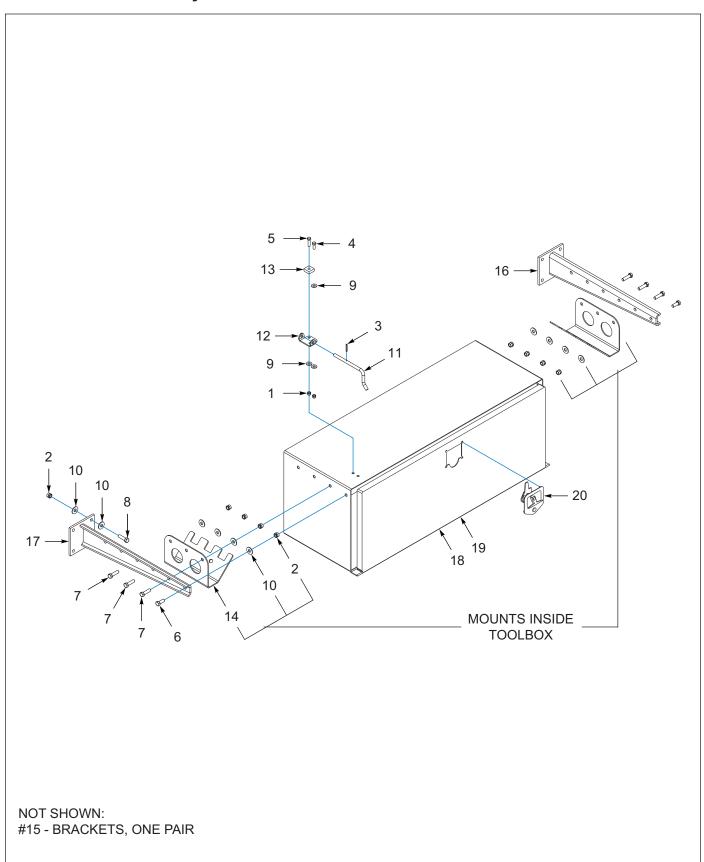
Tool Box Assembly 48 x 18 x 18
